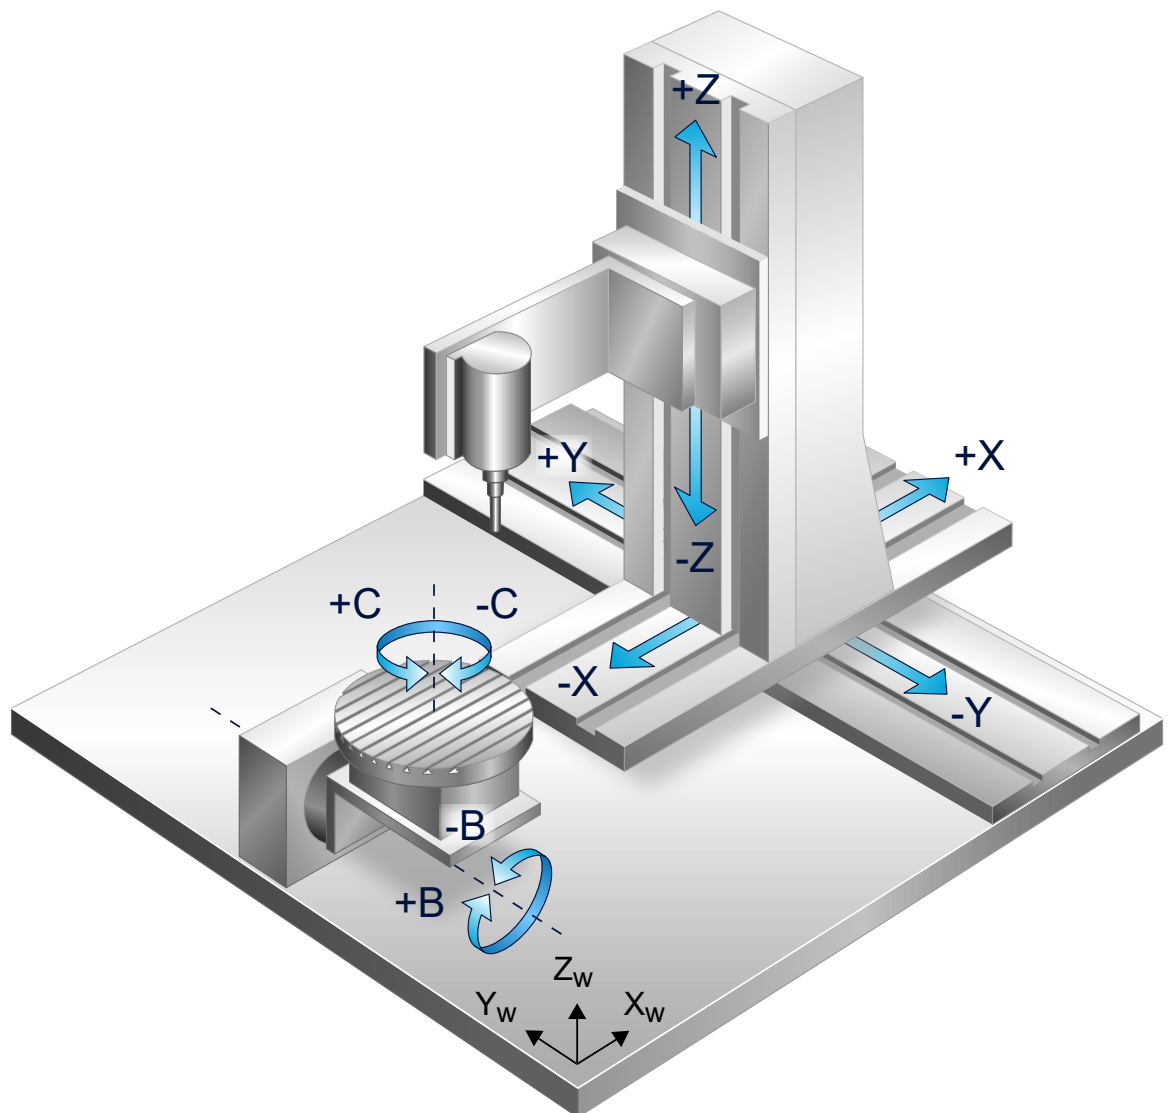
Kinematics of 5-axis machine with BC workpiece table
